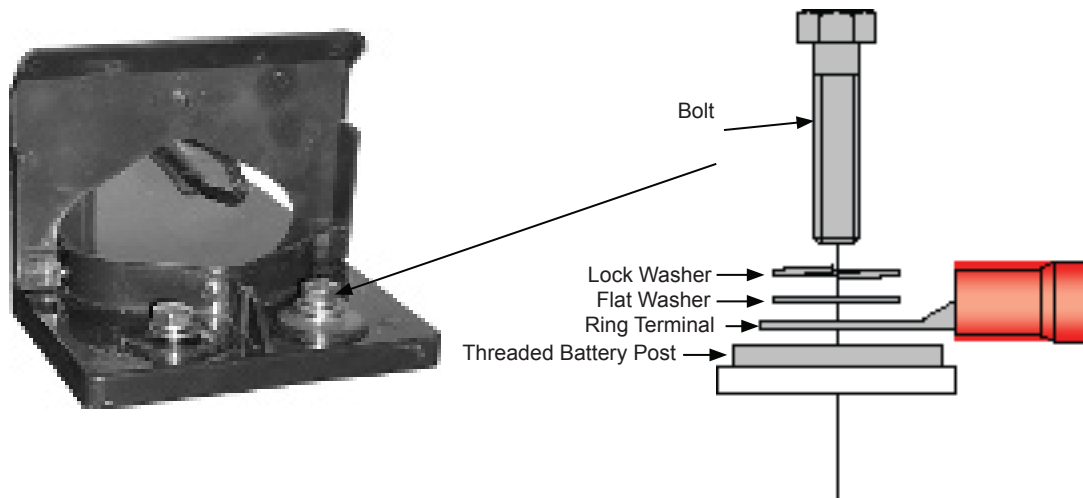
, Typical Ring Lug Assembly for Front Terminal Batteries, Single Lug
